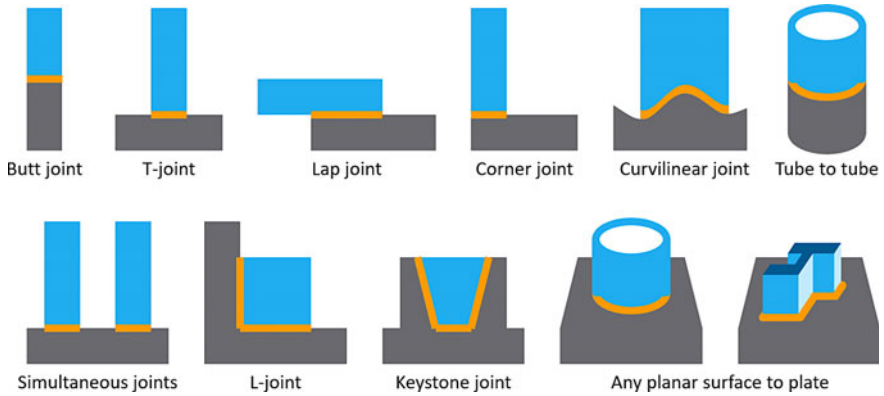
LFW weld configurations. (Color figure online)
